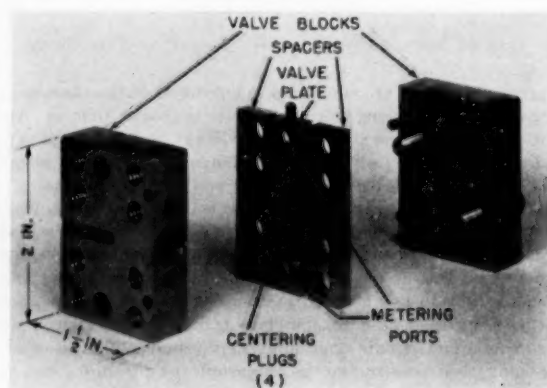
PHOTOGRAPH OF ROTARY-PLATE VALVE
